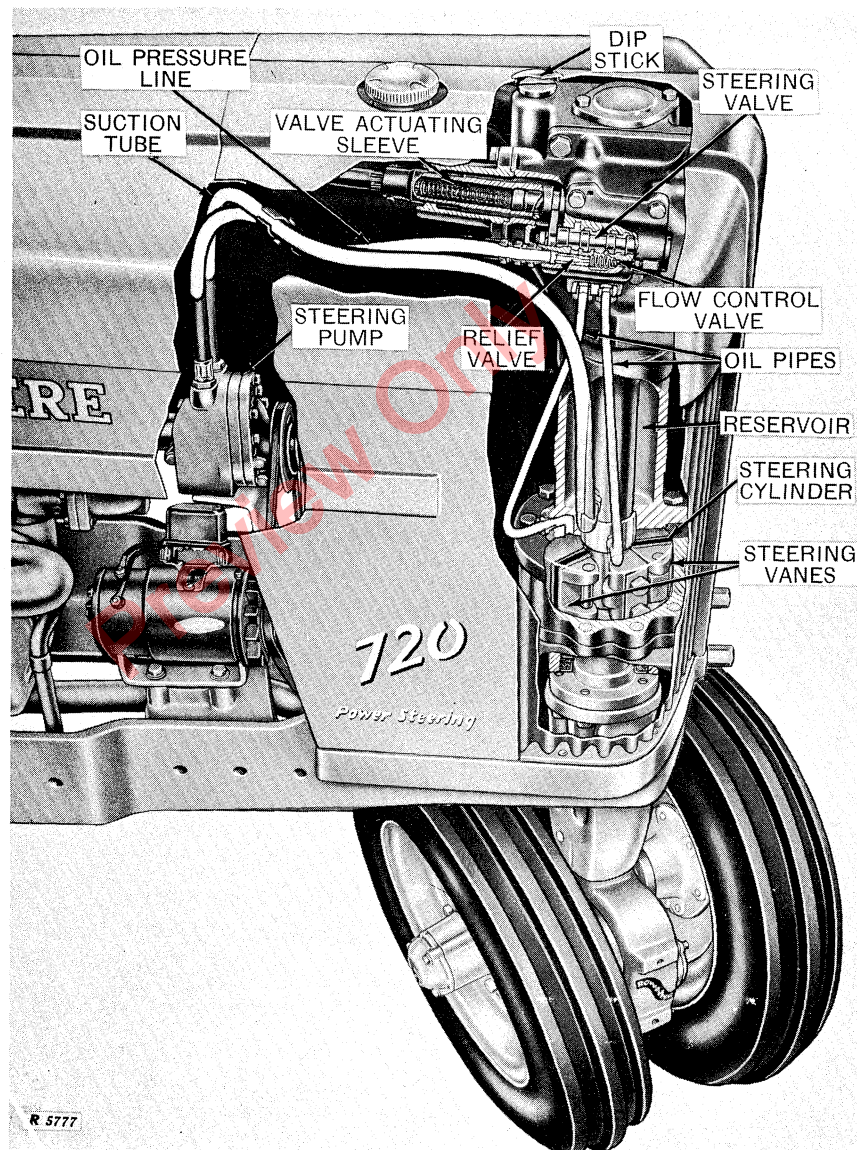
Cutaway View of Power Steering System (Improved Design)
